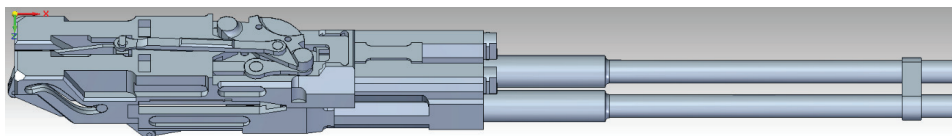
CAD assembly model of the GSh-23 autocannon
